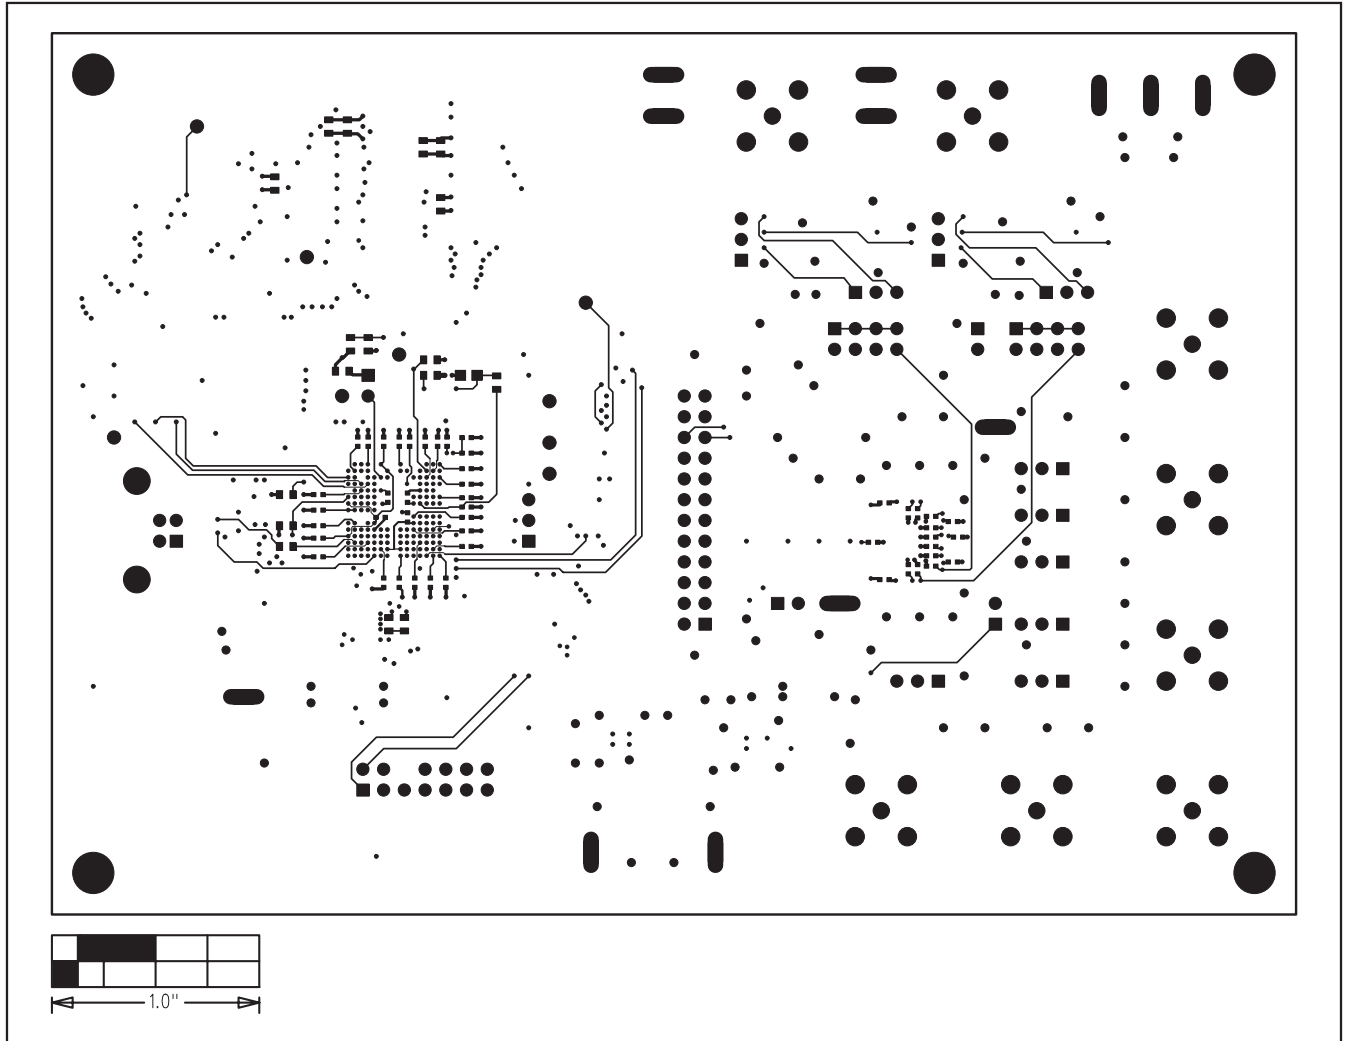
MAX11046 EV Kit PCB Layout—Solder Side
